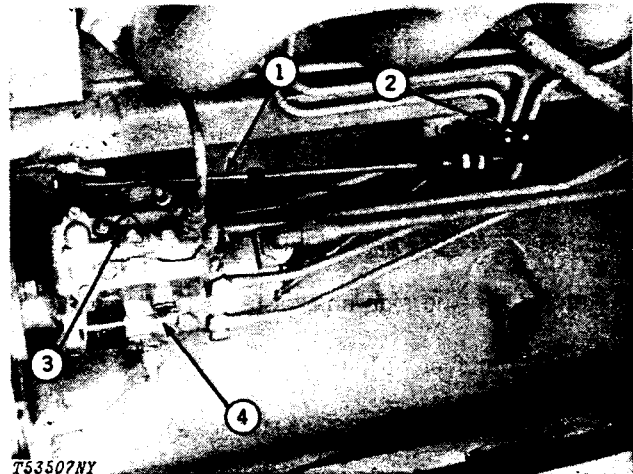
Speed Control Cable and Fuel Shut-Off Wiring
